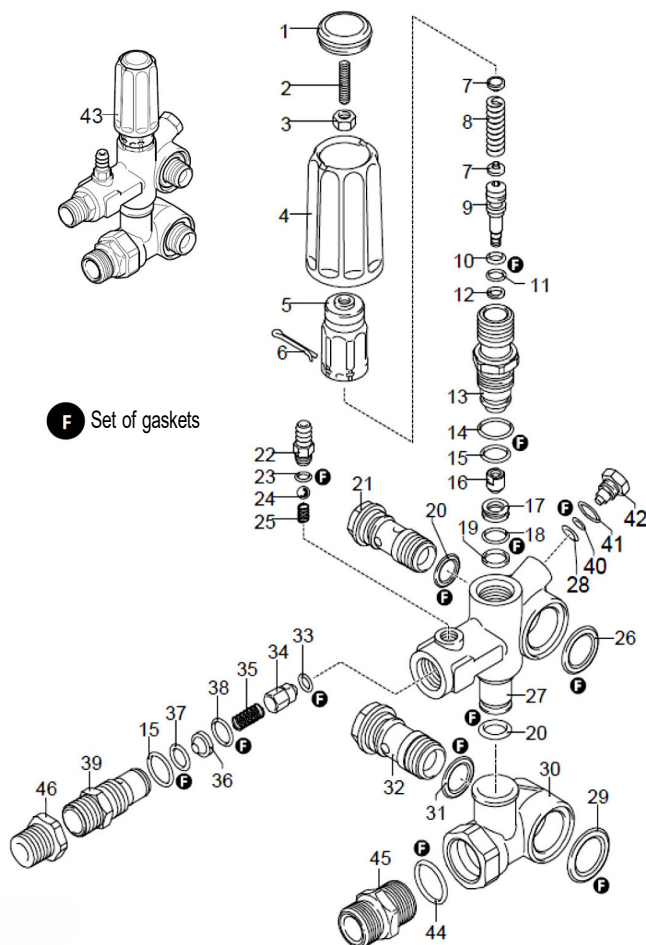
Spare parts drawing 7 and spare parts drawing 8 HDR-K 96-28 BL
